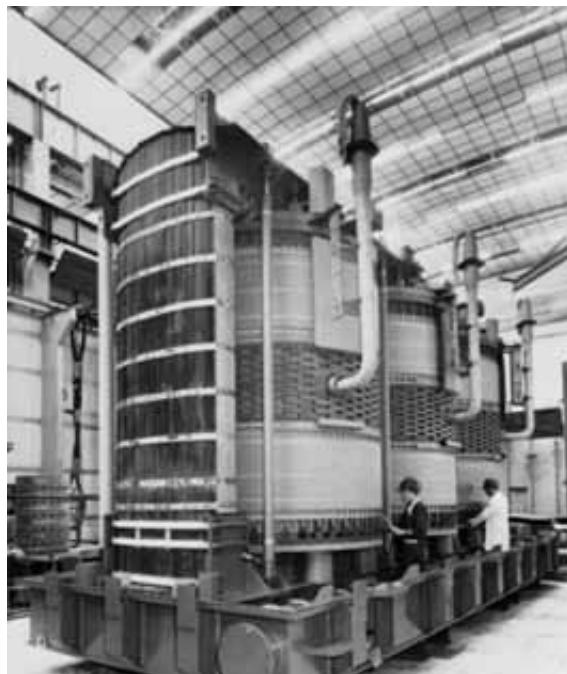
Core and windings of a 776 MVA, 23.5/285 kV three-phase generator transformer, type ODWF (Peebles Transformers)
